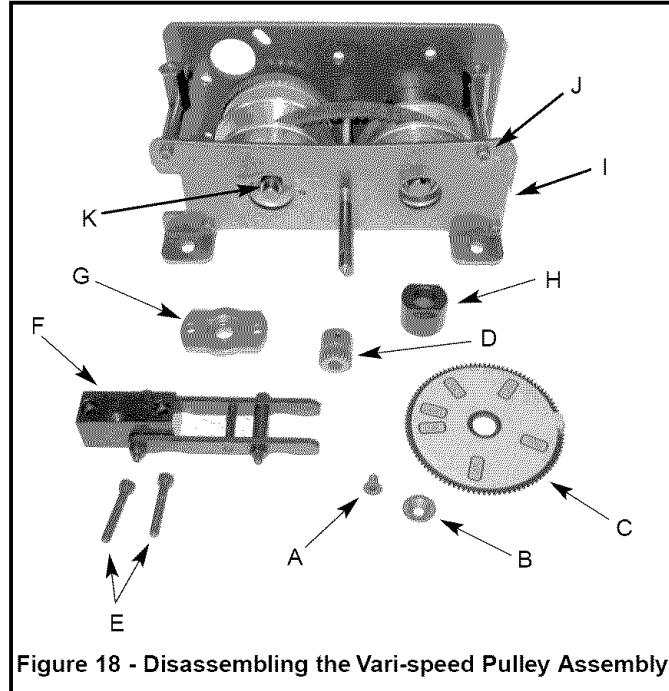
Disassembling the Vari-speed Pulley Assembly
